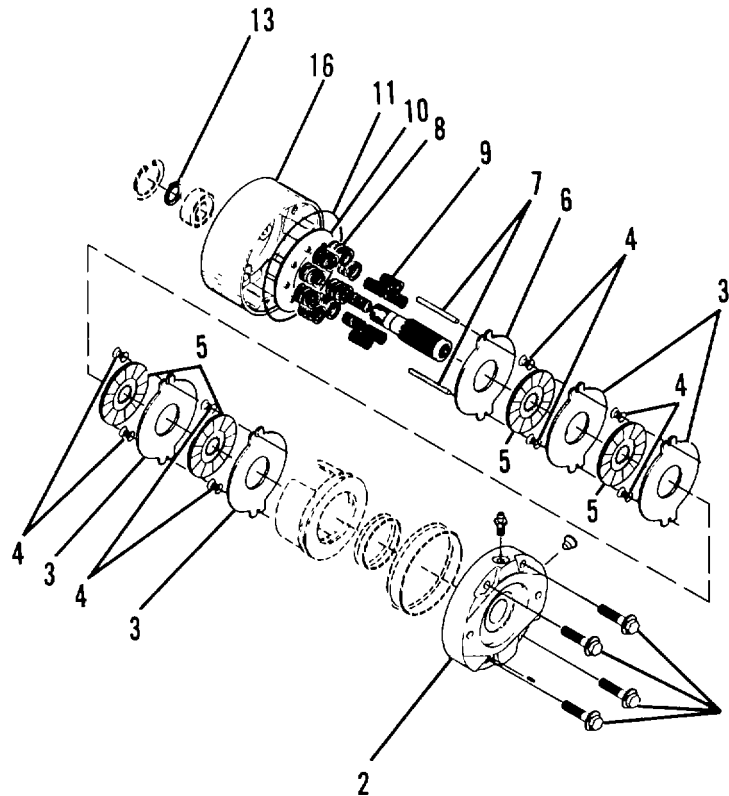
Hydraulic Brake Assembly (Sheet 1 of 2).
